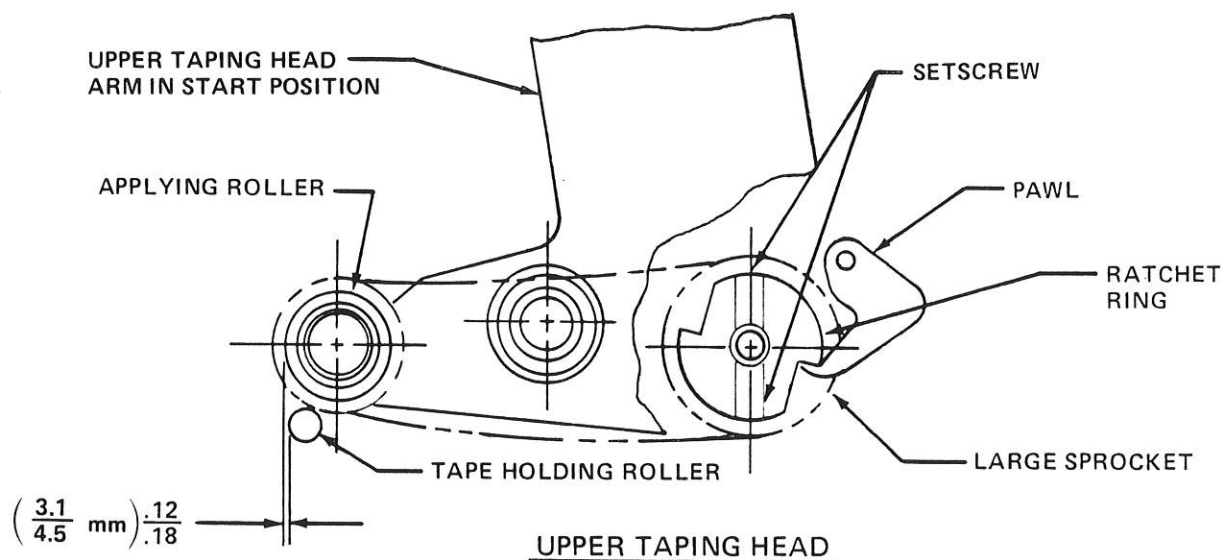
B - TAPE HOLDING ROLLER TIMING
